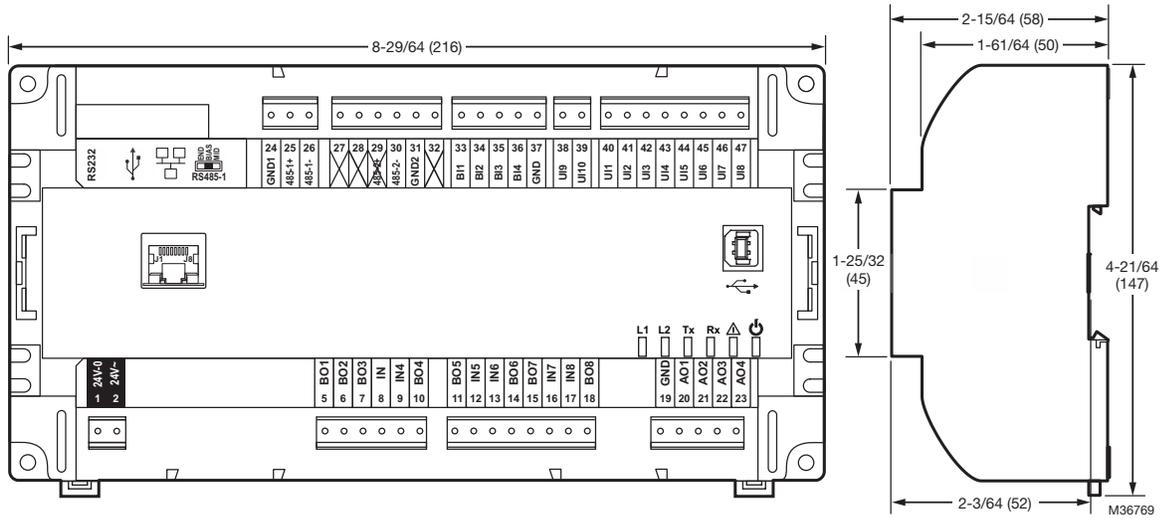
EagleAX Controller (shown: model with onboard I/Os), dimensions (in mm).
